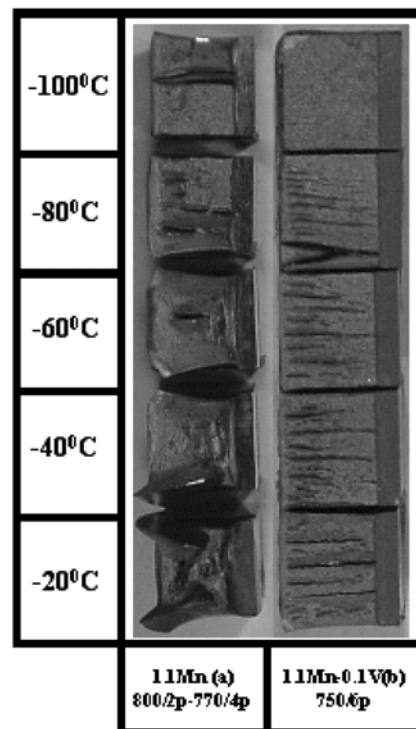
Macro-view of fracture surfaces : (a) 800/2 p-770/4 p rolling and IACC condition of the 1.1 Mn steel; (b) 750/6 p rolling and ACC condition of the 1.1 Mn-0.1 V steel.
